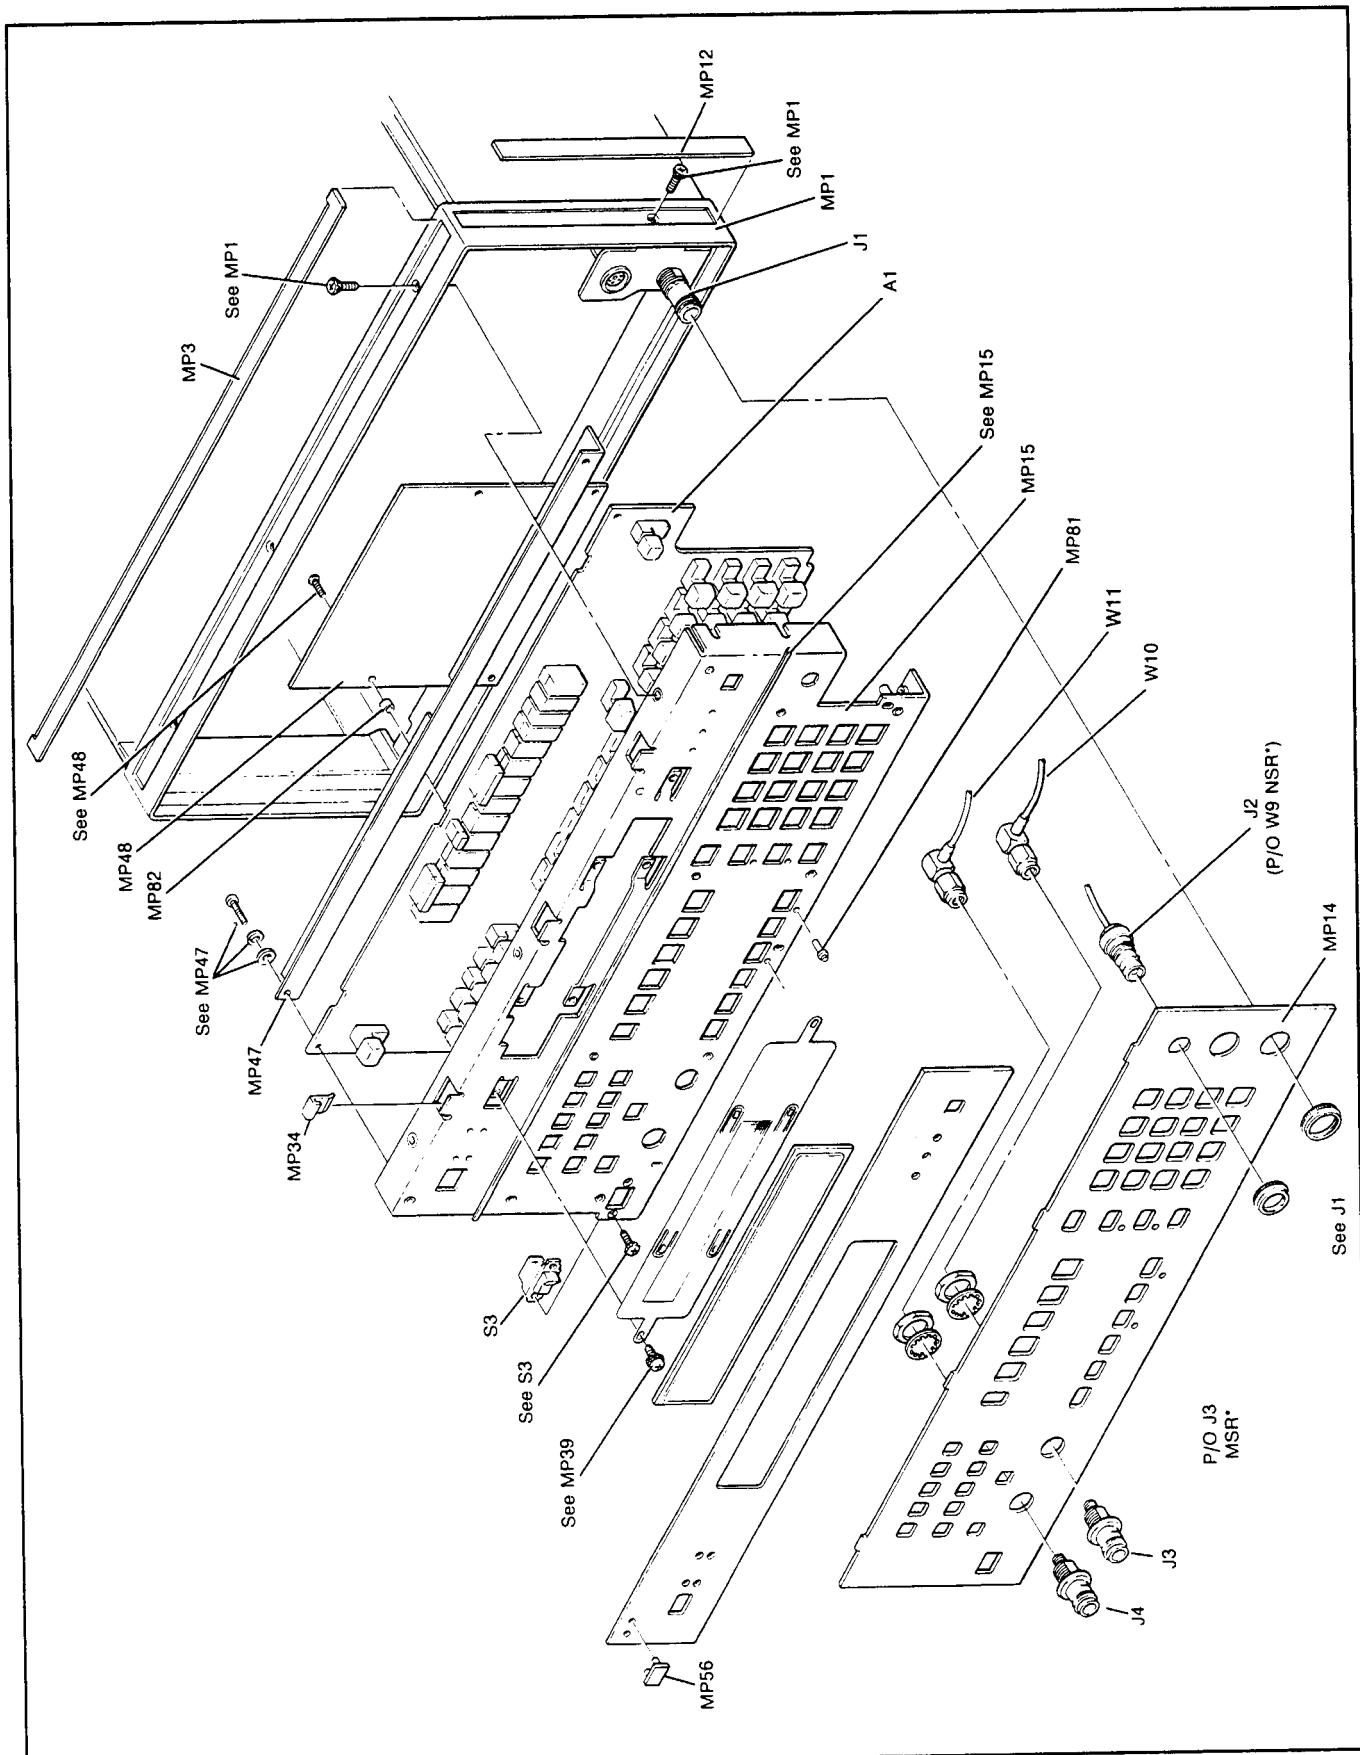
C-3. Illustrated Parts Breakdown of the Front Panel
